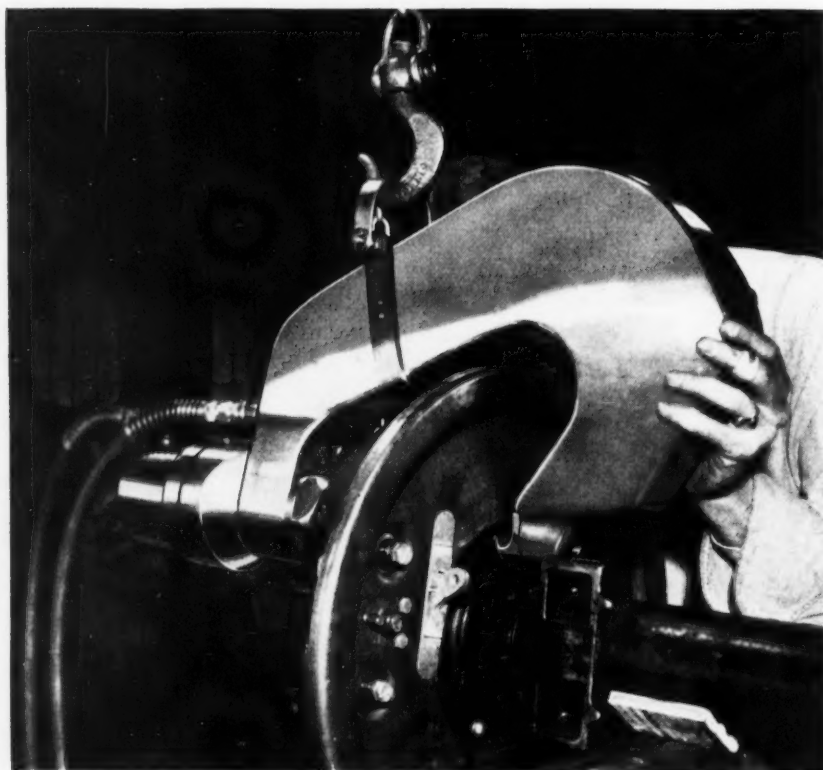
Hydraulic Pressure of 5000 Pounds per Square Inch Squeezes Heads on 1/2 - inch Cold Rivets Noiselessly, at the Rate of Three Seconds Each, in Assembling Automobile Rear Axle Units
